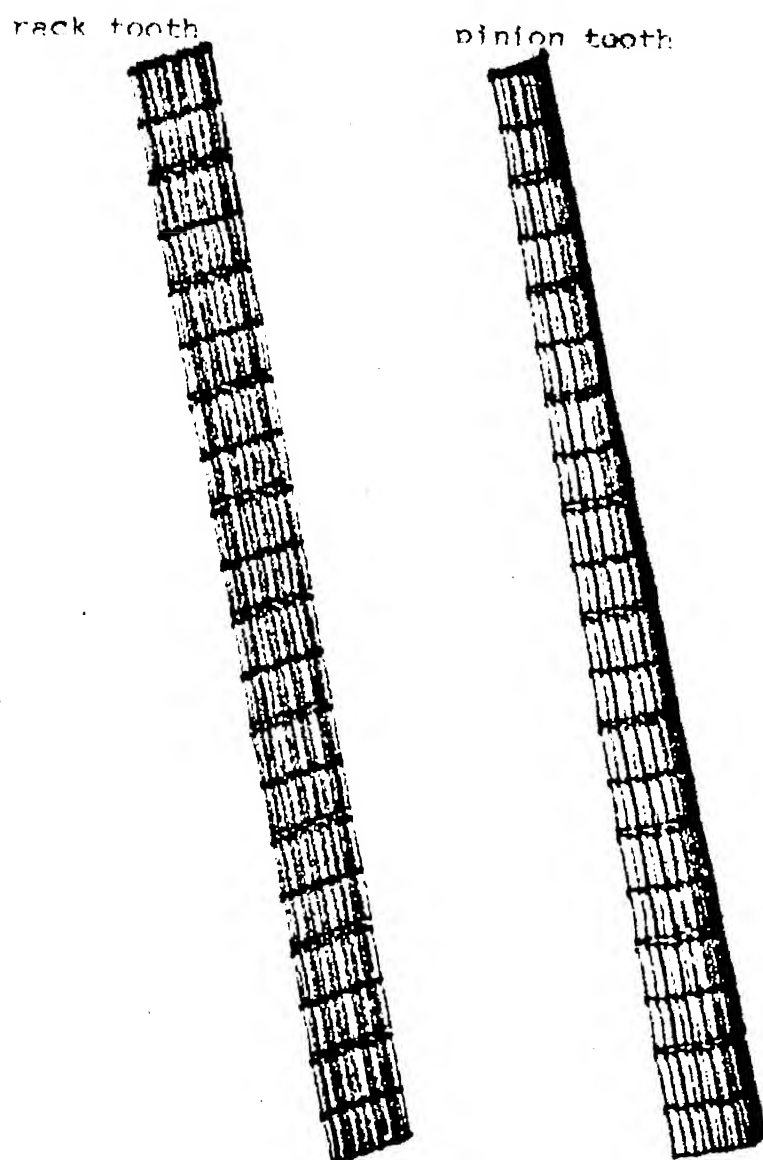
Top views of rack and pinion (helical) tooth surfaces
